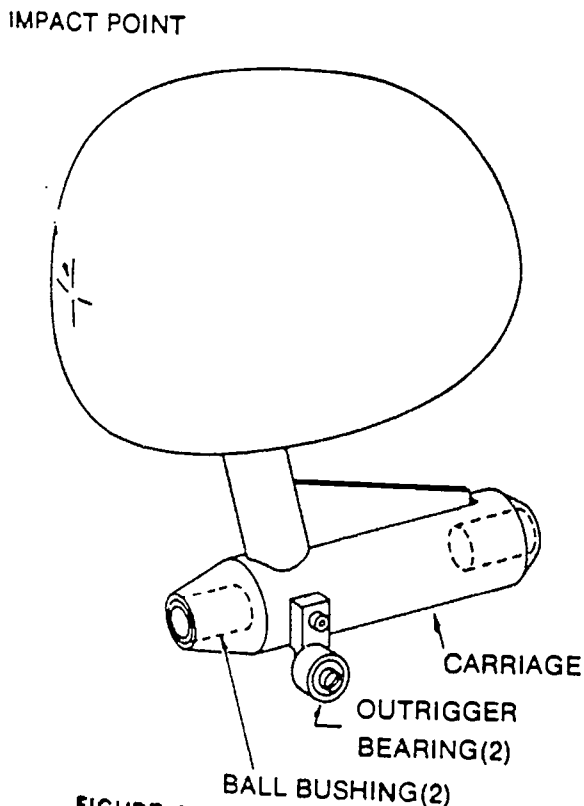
HEADFORM & SUPPORT ASSEMBLY
